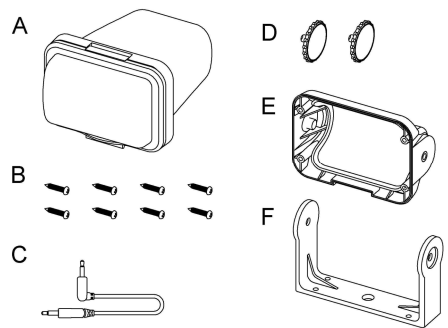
Parts of SM-200. (A) SM-200 audio housing (B) mounting screw ×8 (C) audio cable with 3.5mm 4-pin plugs (D) thumbwheel screw ×2 (E) housing holder (F) Bracket
